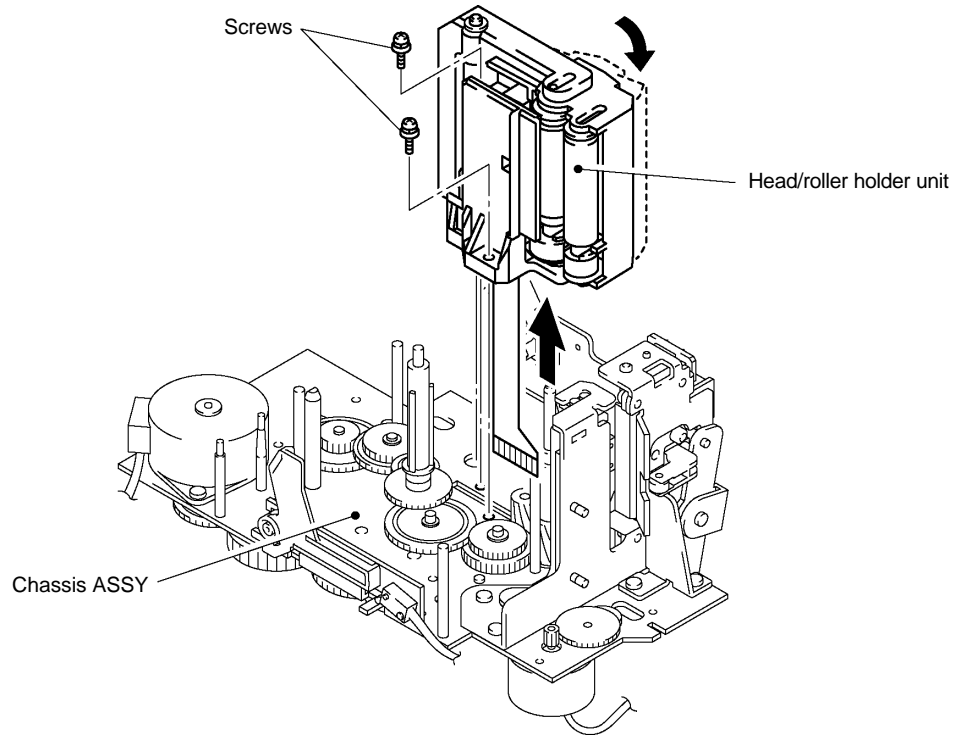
Removing the Head/Roller Holder Unit
